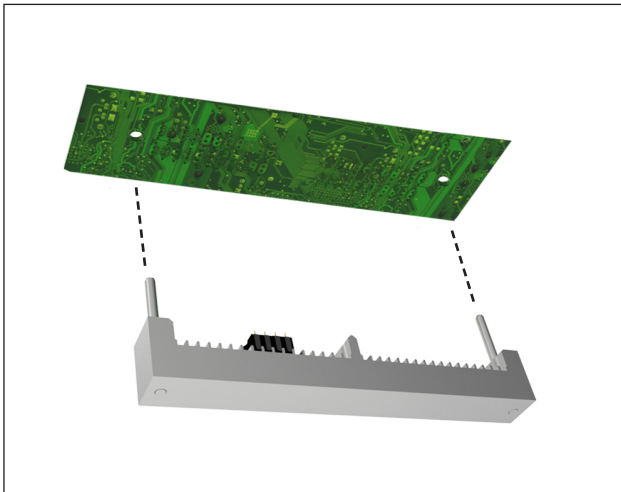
Figure A. The PCB should have alignment holes to accept the alignment pins of the insertion tool.
